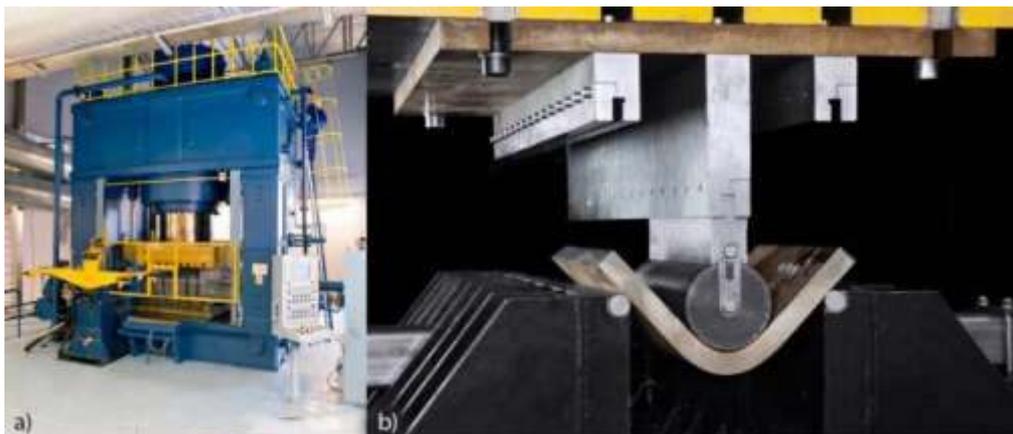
a) Hydroforming machine and b) bending tools built in the machine
